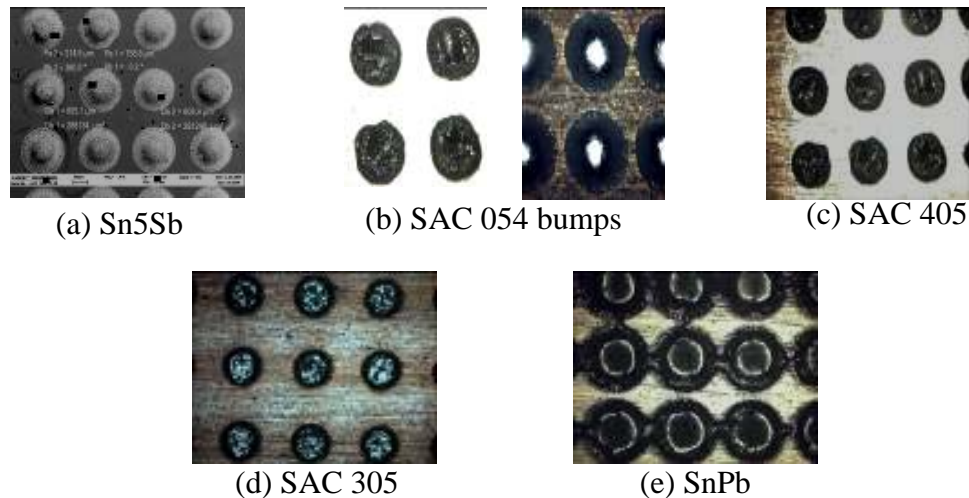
Re-flowed micro-solder balls formed through screen printing technique.
